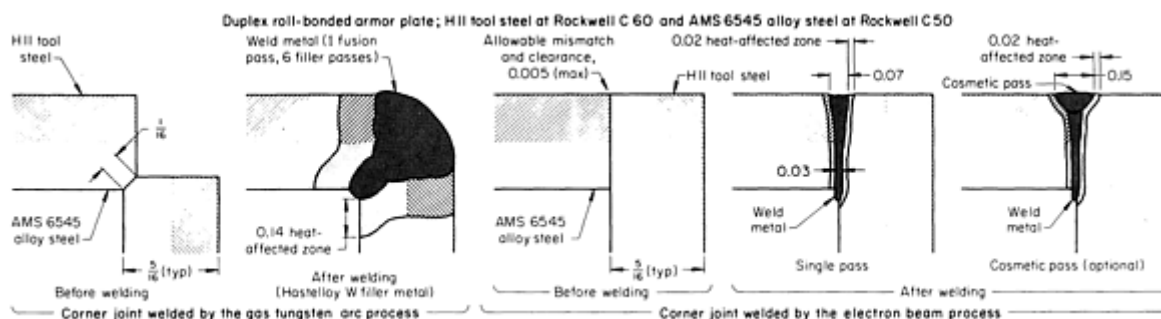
SCHEMATIC OF CROSS SECTIONS THROUGH CORNER JOINTS AND WELDS TO SHOW VARIATION IN THE SIZE OF WELDS AND HAZ THAT ARE OBTAINED WITH EBW AND GTAW
